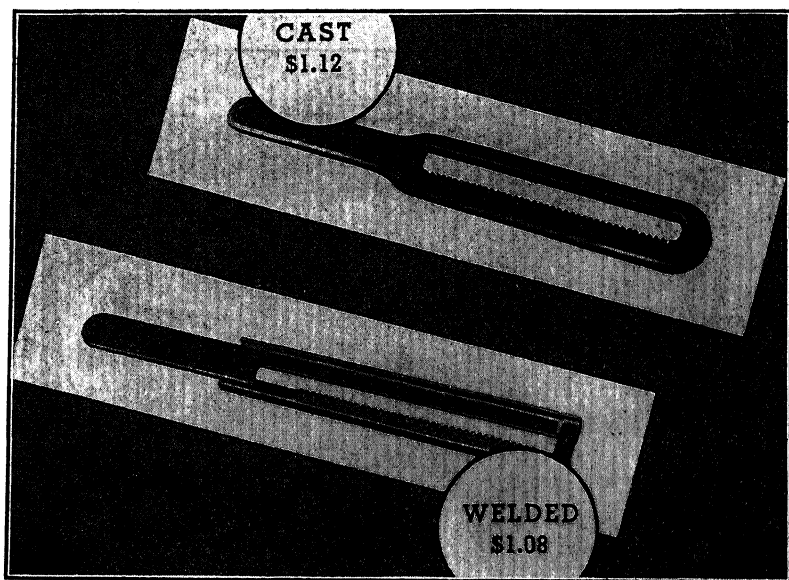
This rack, used for adjusting the tilt of a saw table, formerly of cast iron, cost \$1.12, weighed 11 lbs., and was often broken in service. The new welded steel rack costs only \$1.08, weighs 6 lbs., is unbreakable and operates more smoothly.
